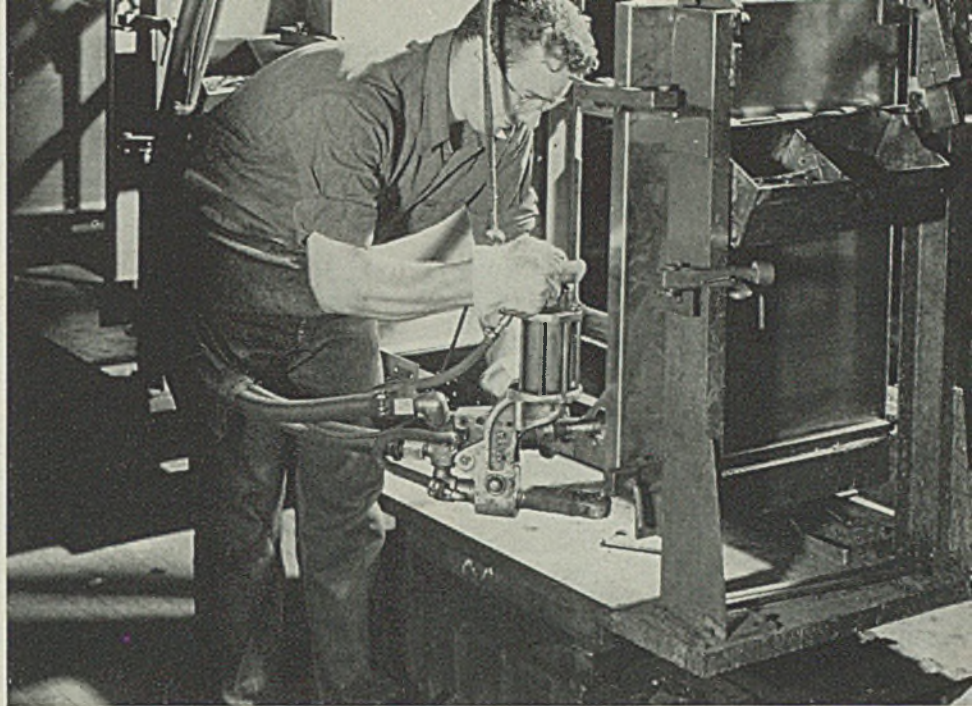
Special jigs hold the wrapped steel sheet onto reinforcing sections while a special gun welder joins the parts quickly and accurately. The resistance welding gun is arranged to apply a current of about 400 amperes while exerting a force of 350 pounds between the two electrodes
